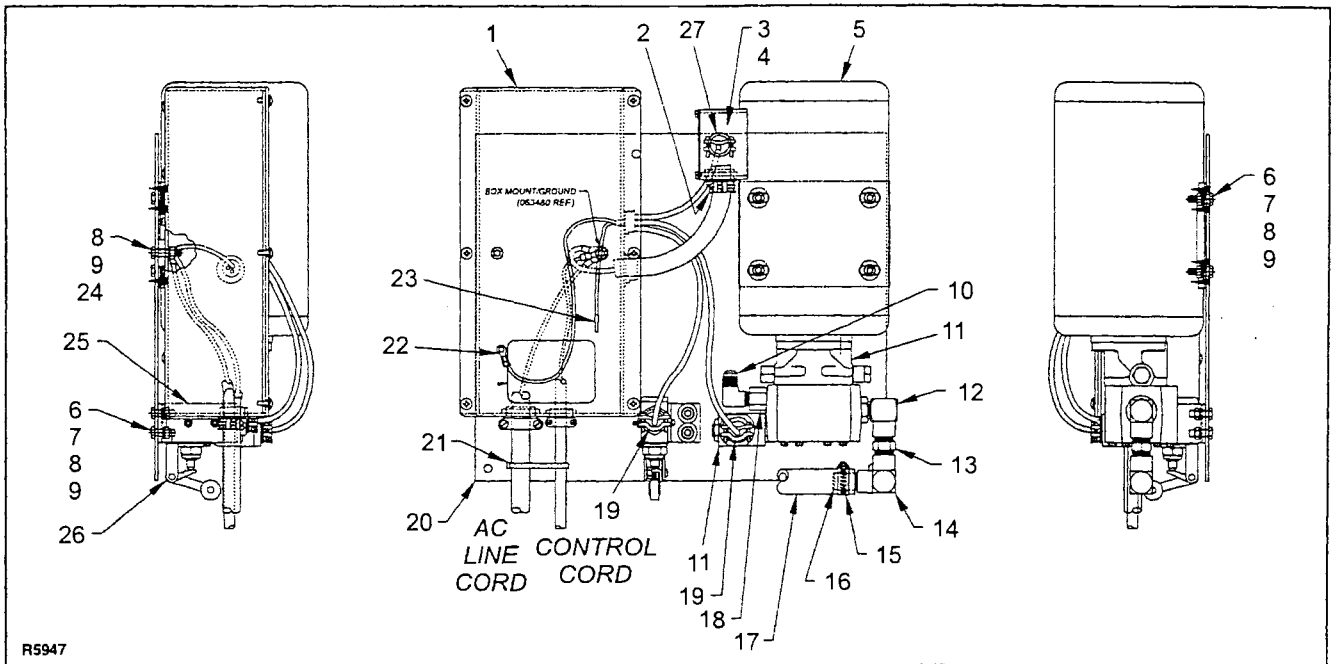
Lift Table Panel Assembly (36/48/60" Tables)
